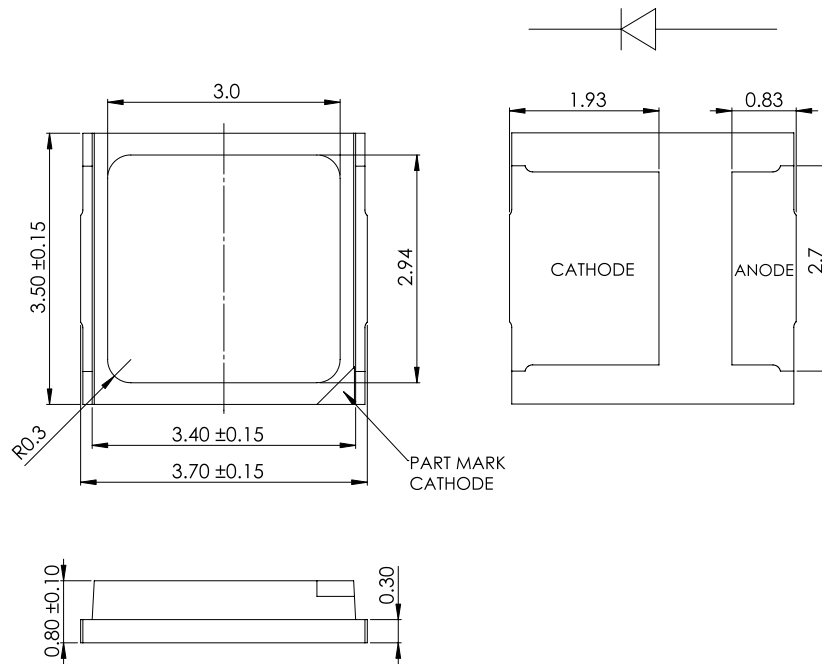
Mechanical dimensions for L135-xxxxSA35000P1.
